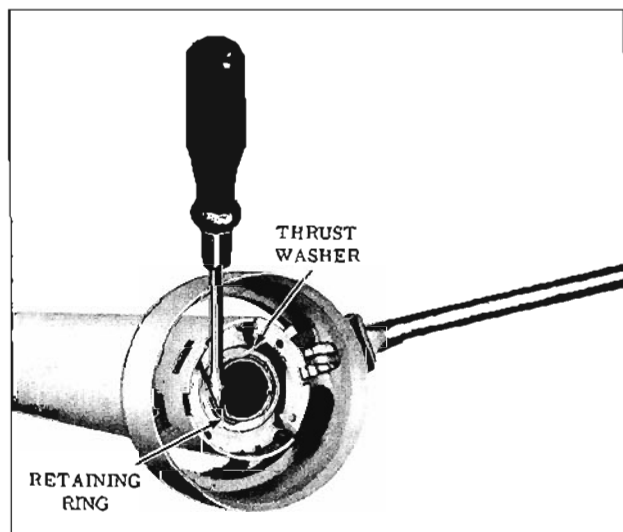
Removing Shift Tube Upper Retaining Ring
